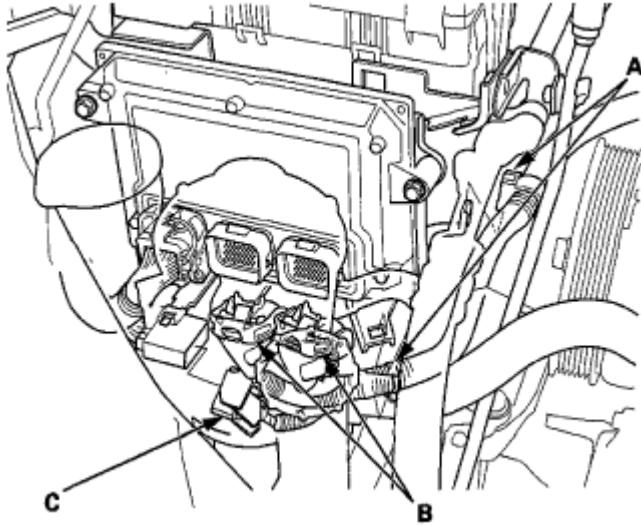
Identifying Harness Clamps, PCM Connectors And Engine Wire Harness Connector
